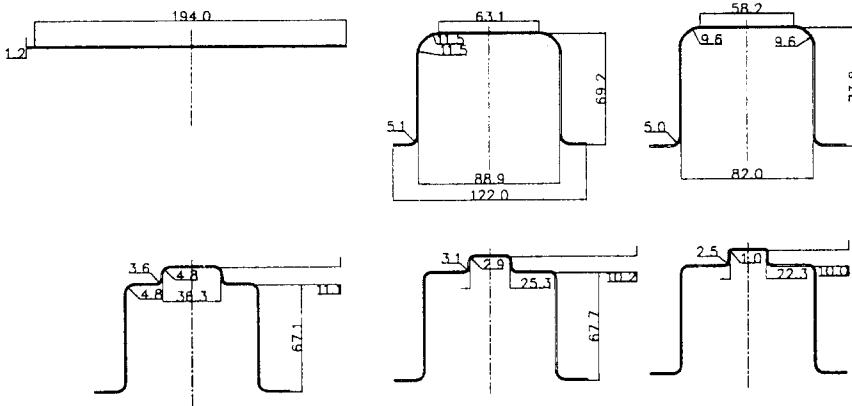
Sequence drawing for the deep drawing parts of the "Motor Housing" using rule 12, 19-21)
